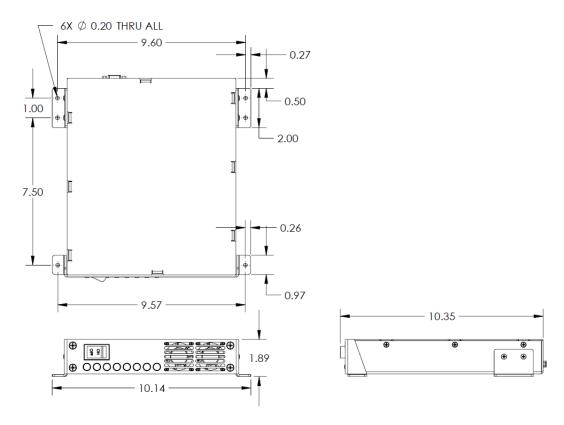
Dimensioned drawing of the standalone PowerHub mounting option.
